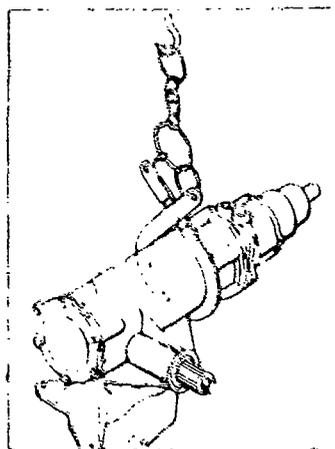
Removing the steering mechanism from the vehicle with the help of a KZ-0352 device
